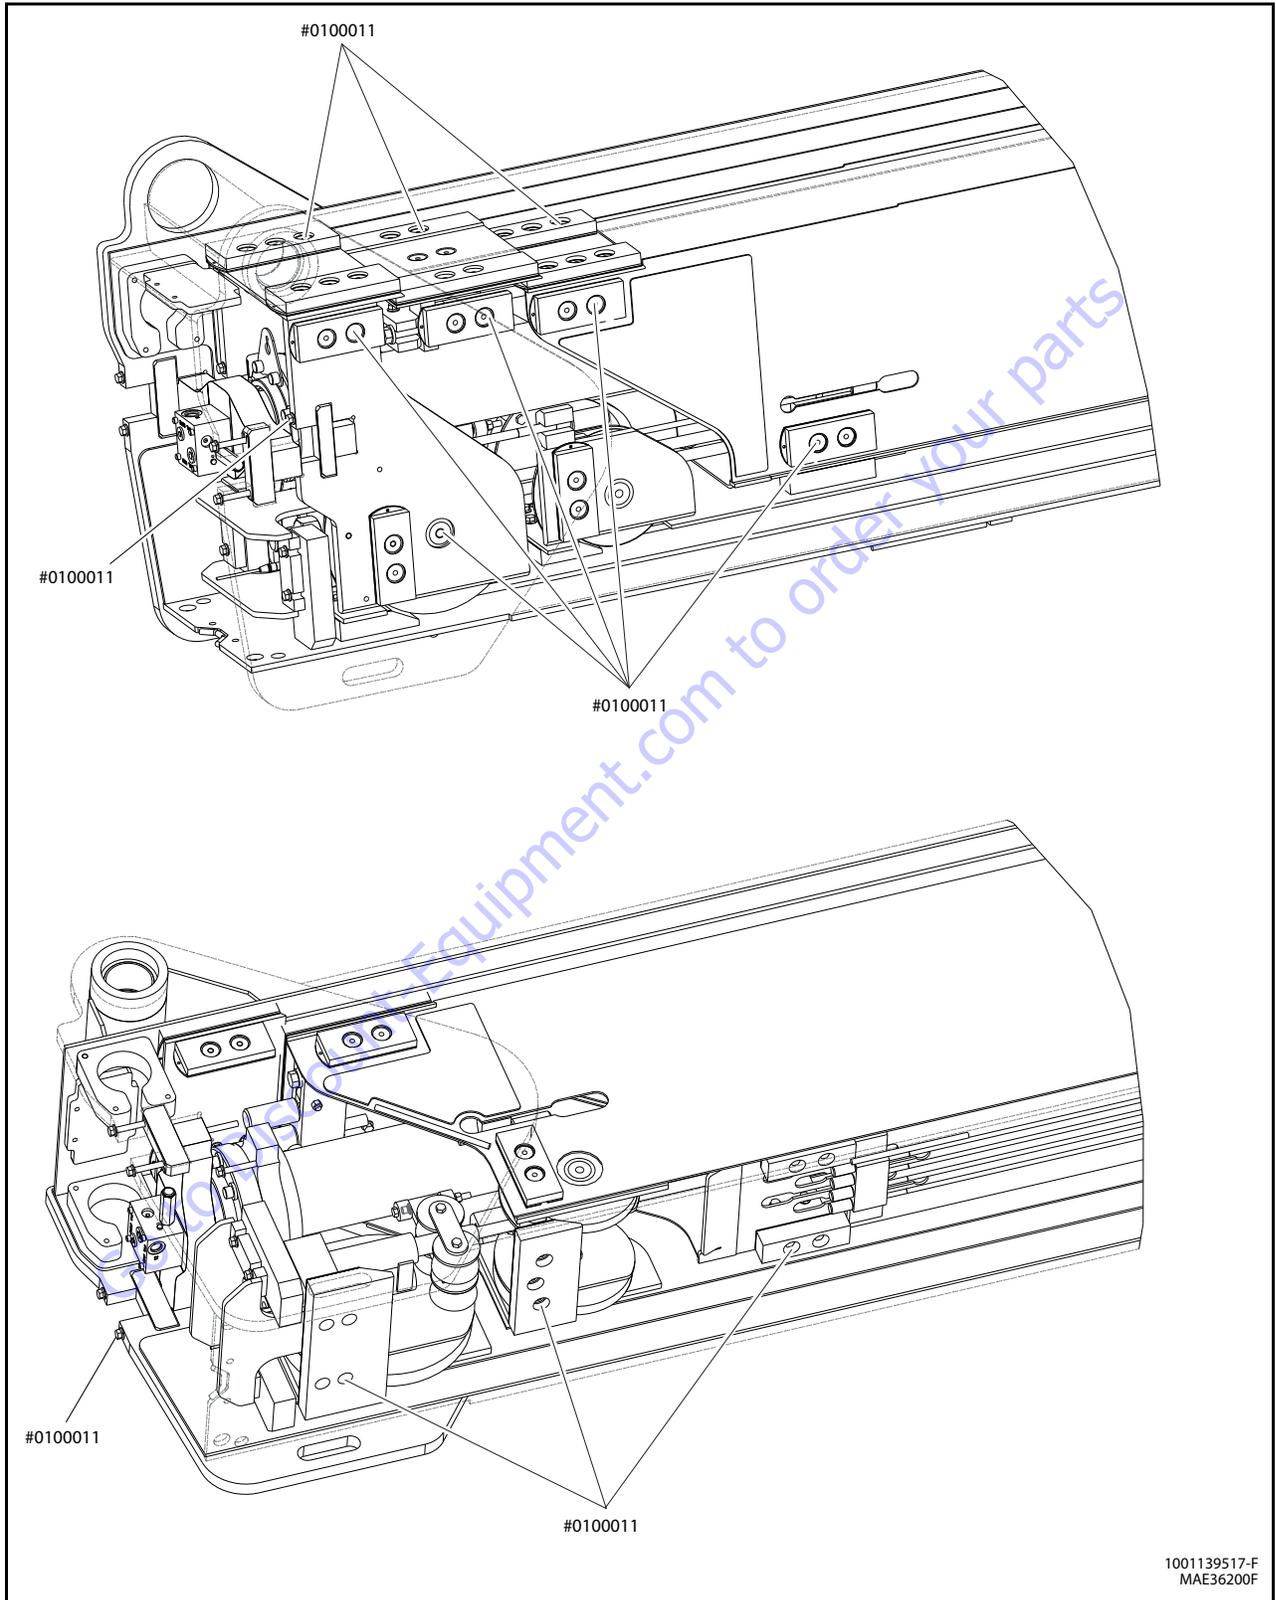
Locations for Threadlocker Application - Sheet 2 of 4
